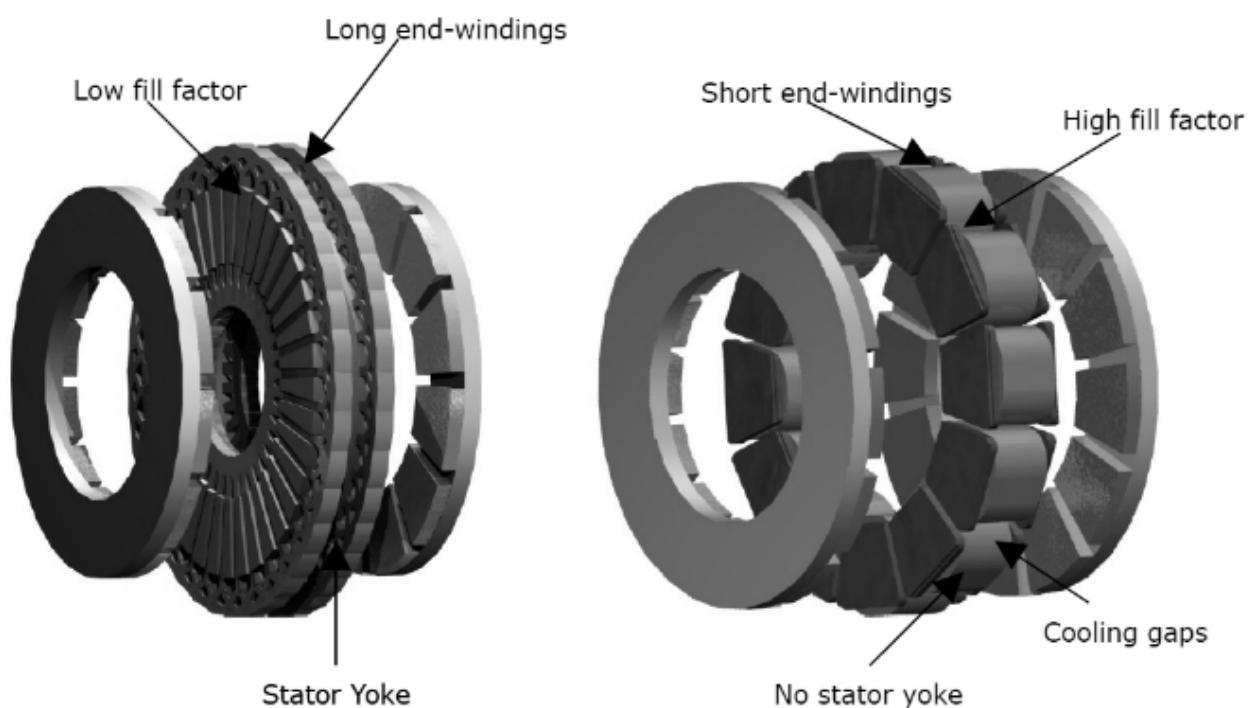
Left – typical axial flux machine; right – YASA machine¹
